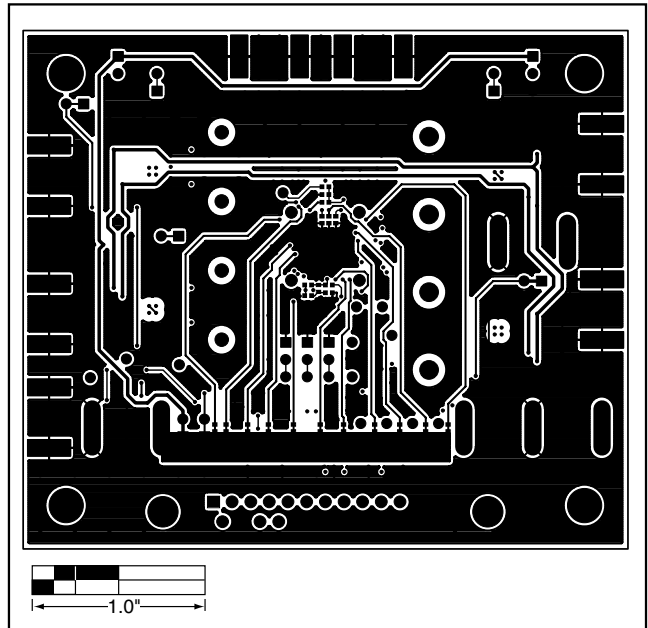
MAX2820/MAX2821 EV Kits PC Board Layout—Solder Side
